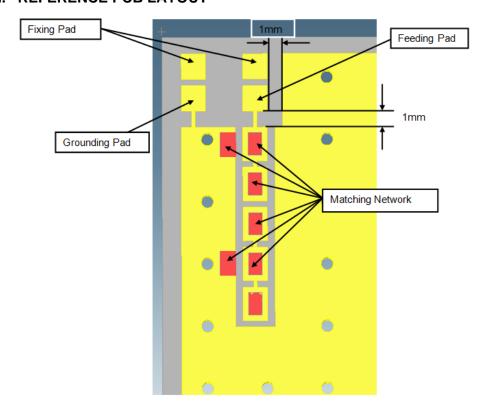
RECOMMENDED PCB LAYOUT FIXED DO NOT GROUNDED (Note: PCB size of 100 mm x 40 mm)
